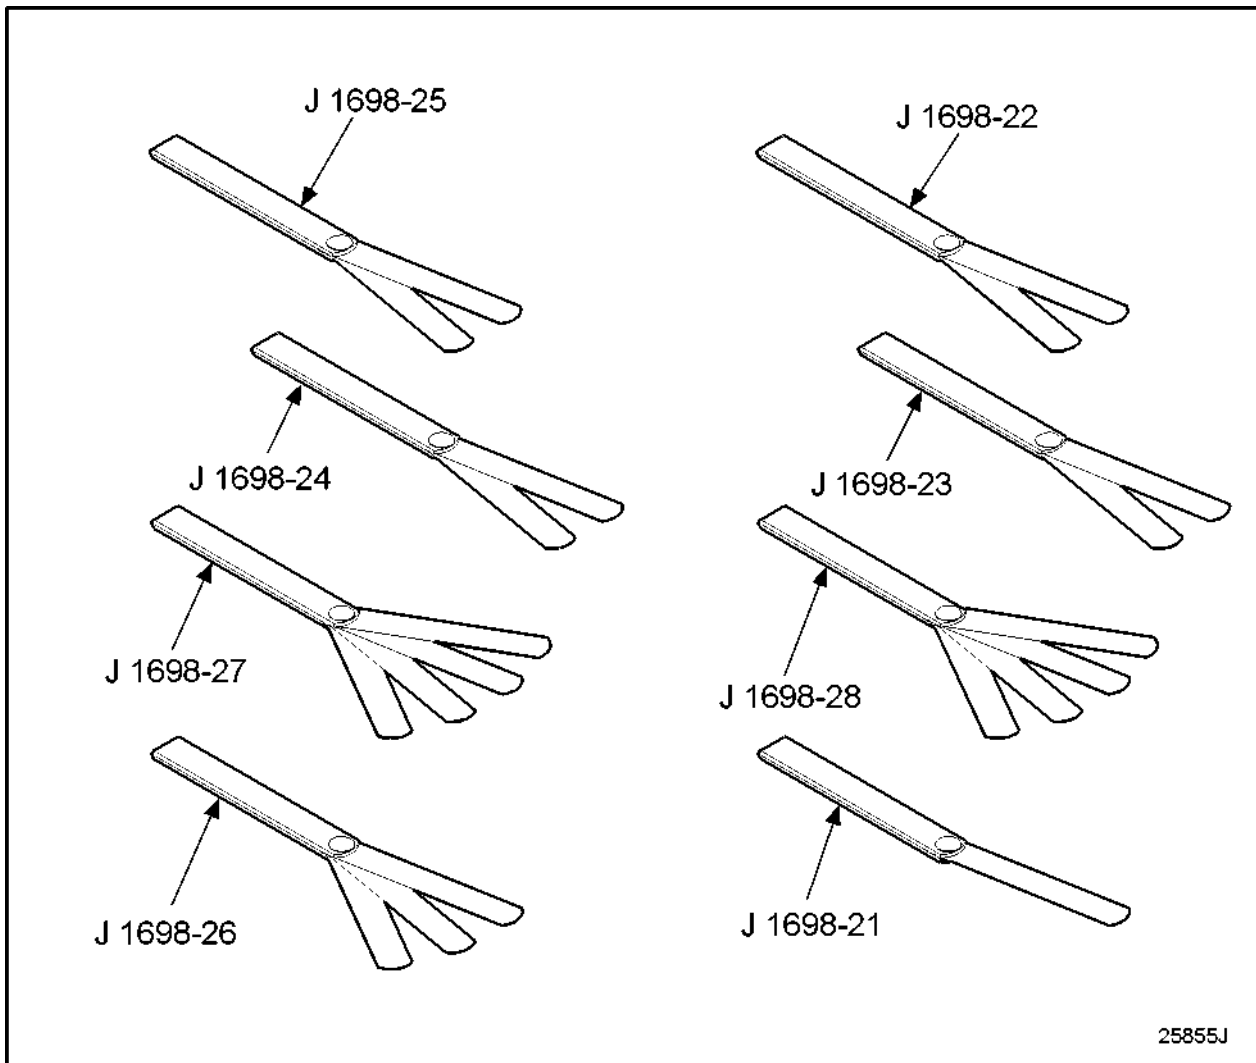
Rotor Clearance Feeler Gage Set, J 1698-02
